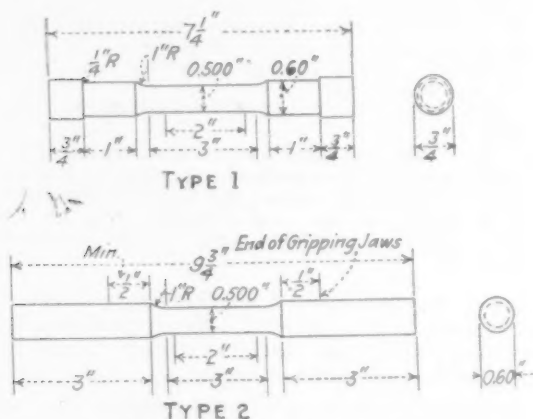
Specimens, Types 1 and 2, to Be Tapered in Diameter From 0.510 In. at the Ends of Gage Portion to 0.500 In. at the Center of Gage Portion; Specimens to Be Cast to Above Dimensions and Tested Without Machining
